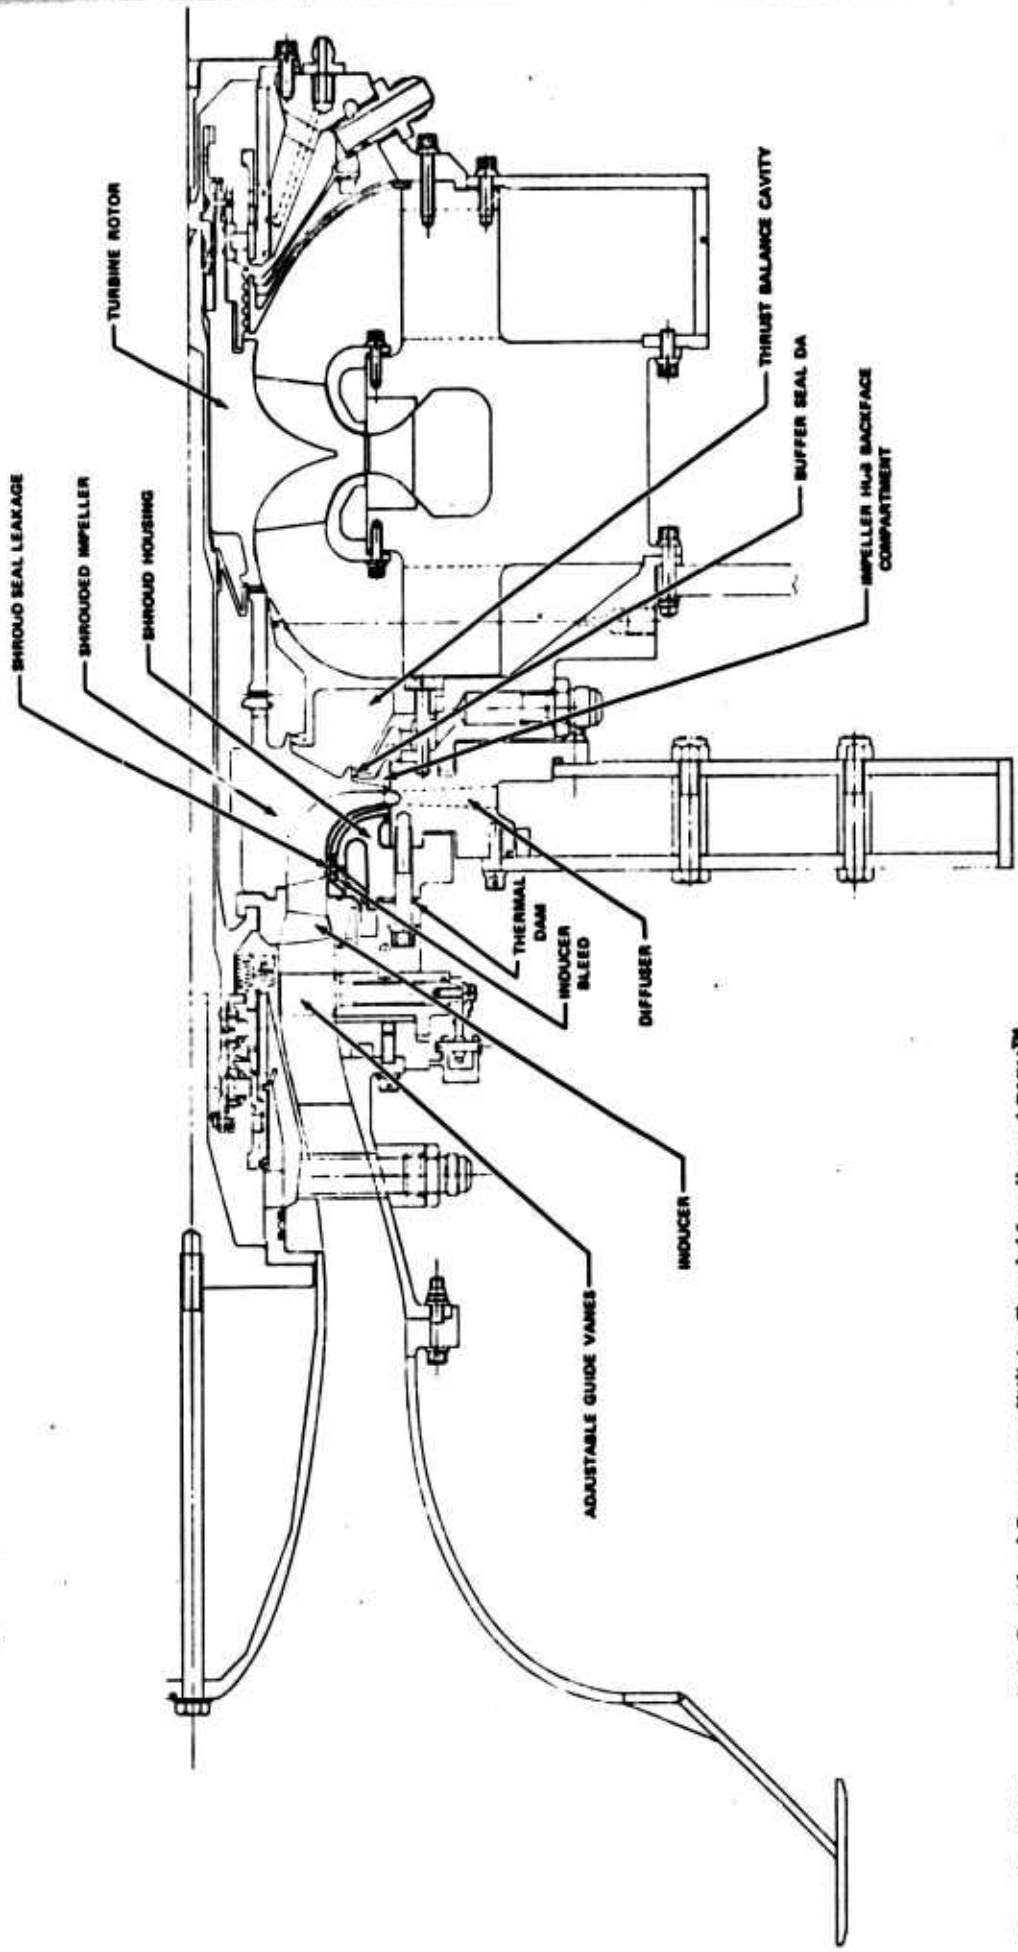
10:1 Pressure Ratio Centrifugal Compressor Utilizing Shrouded Impeller and PAWA™ Drive Turbine.
